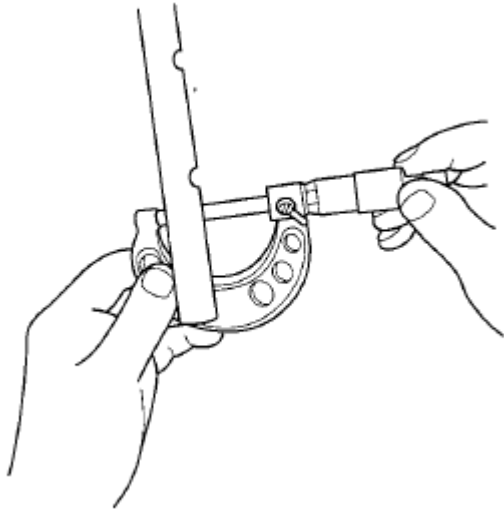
Measuring Diameter Of Shaft At First Rocker Location
